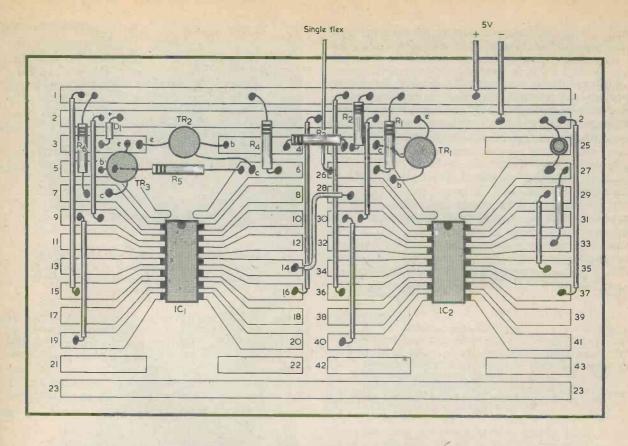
Completing the assembly. Here, the transistors and resistors are wired to the Blob Board
